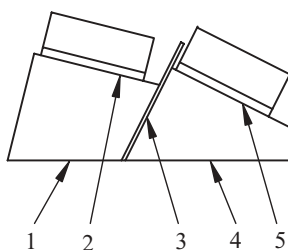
A tandem probe conceptual design: (1) wedge receiver with (2) crystal assembly, (3) acoustic and electric insulators, (4) wedge transmitter with (5) crystal assembly.
